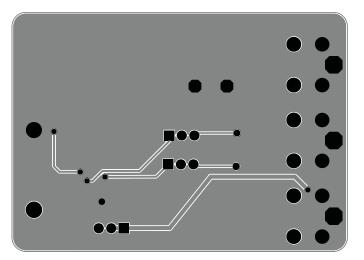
AHK3296IJQ Evaluation Board Bottom Side Layout.
